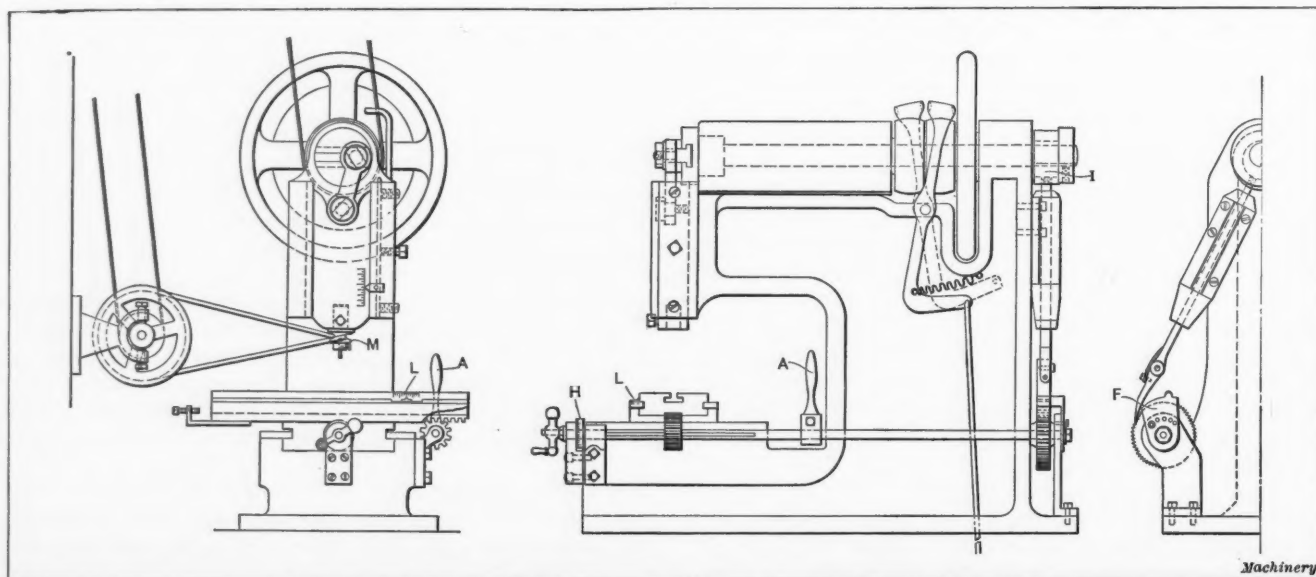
Die-sinking Machine for finishing Dies used in making Fancy Buttons
